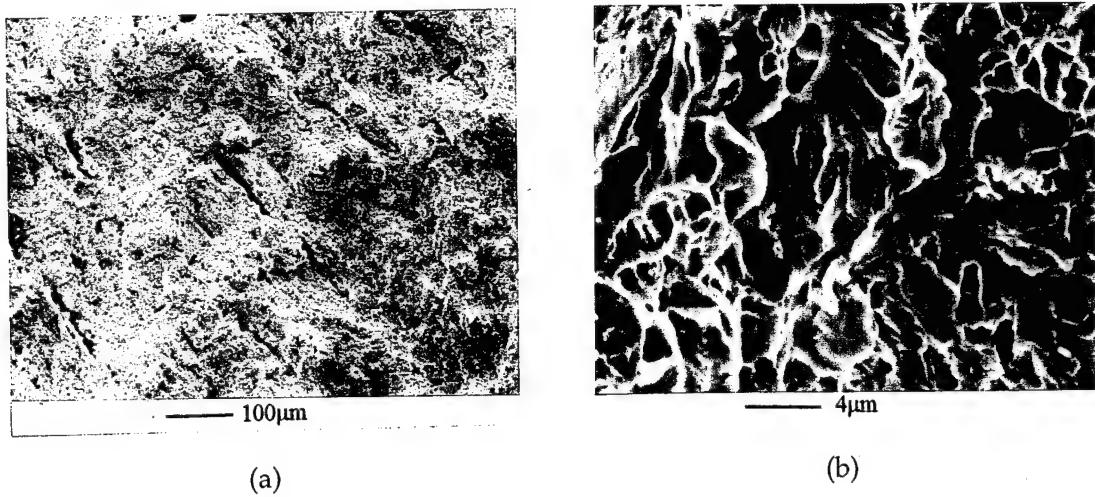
Scanning electron microscopy of Q1N weld metal, notched tensile specimens (a) Radial cracking in the fibrous region, 21°C, and (b) Quasi-cleavage on a radial crack, -104°C.
